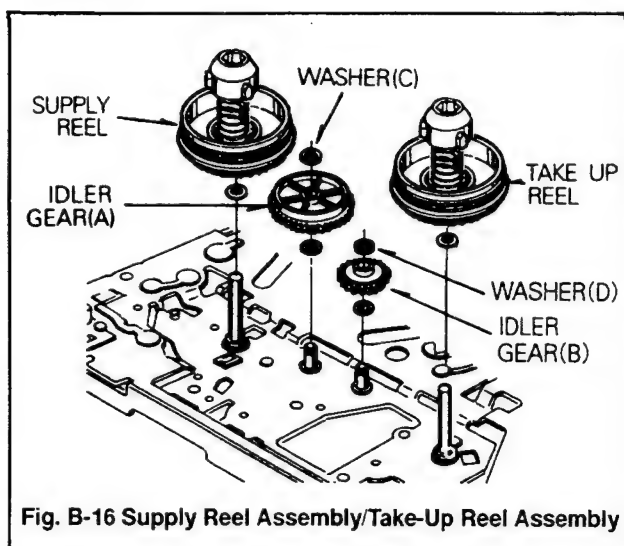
Supply Reel Assembly/Take-Up Reel Assembly
